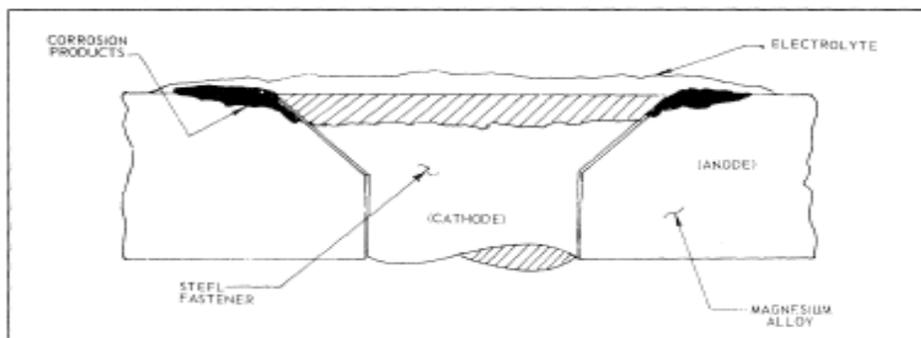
GALVANIC CORROSION OF MAGNESIUM ADJACENT TO STEEL FASTENER
